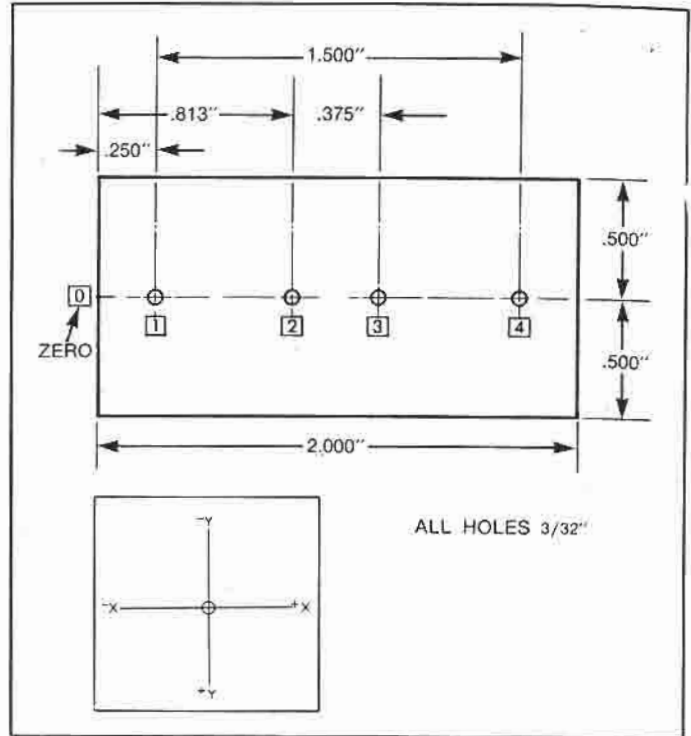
Workpiece Example (Dimension/Step # /Store)
